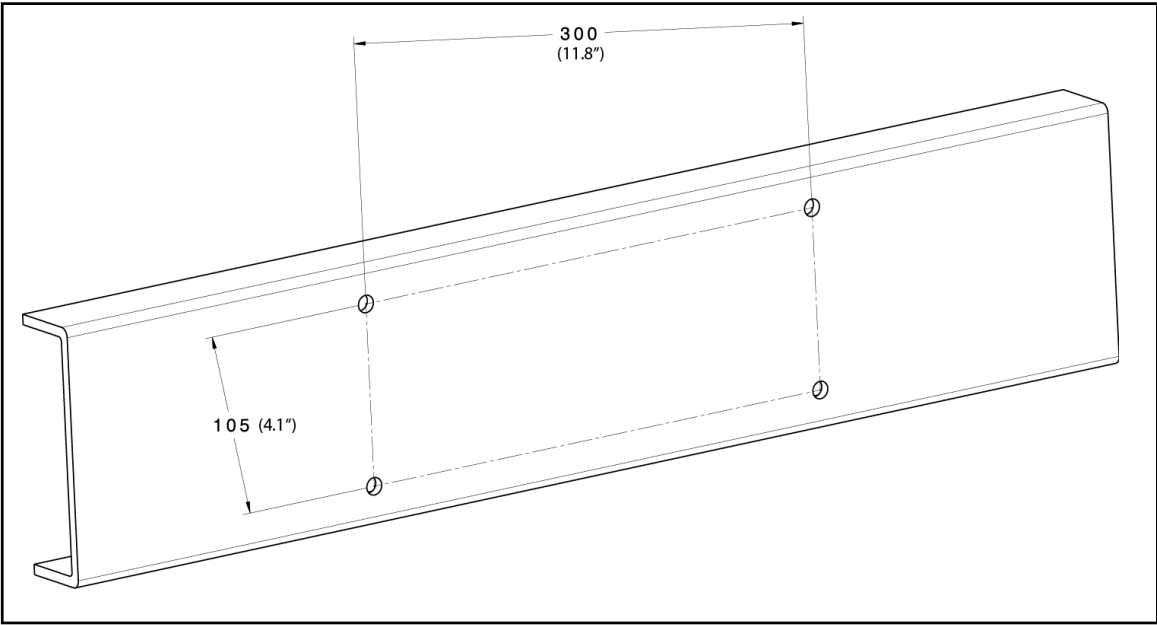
Do not drill holes through top or bottom of vehicle frame flanges!
